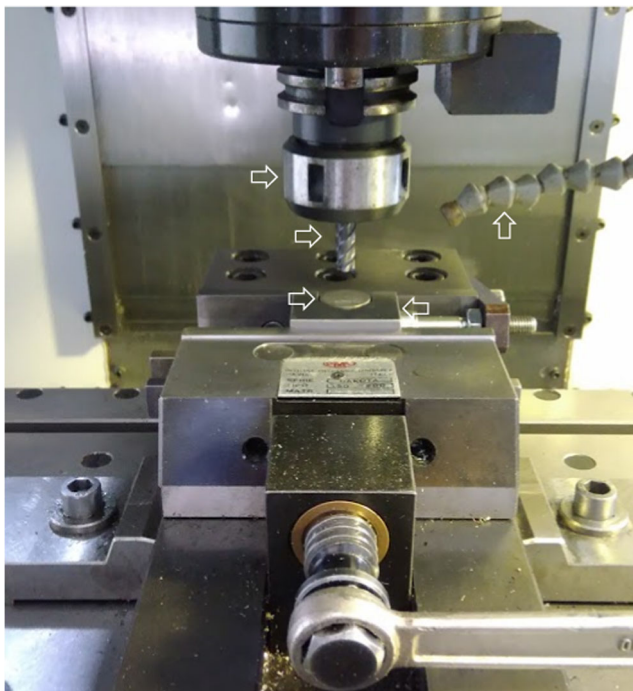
Experimental setup of helical milling tool life tests (i) tool holder, (ii) end mill, (iii) workpiece, (iv) fixture device, (v) air cooling system
